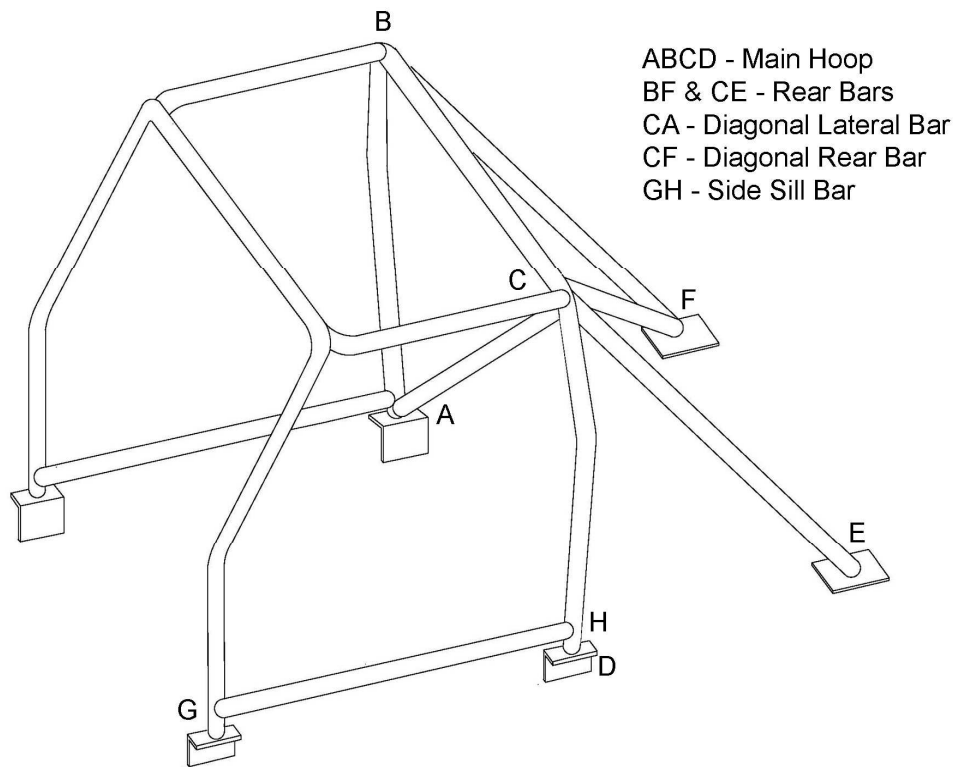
ROLL CAGE (HALO HOOP)
